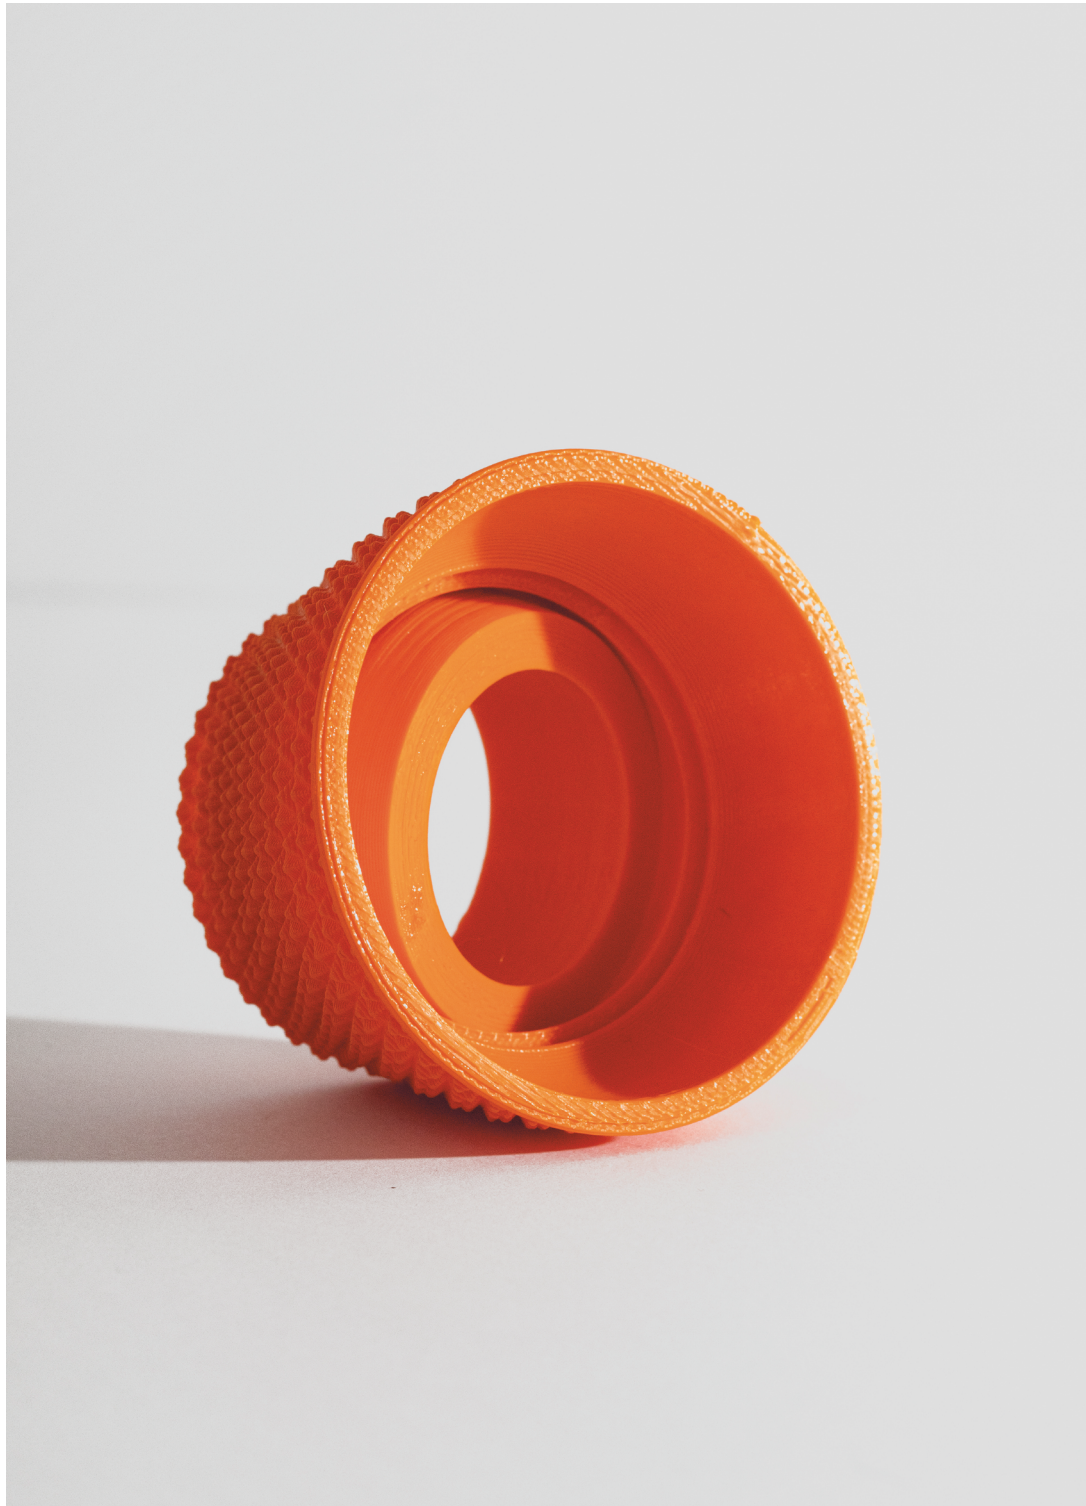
3D printed bearing gear with the tangible exterior. Photo by Marcell Kazsik.
